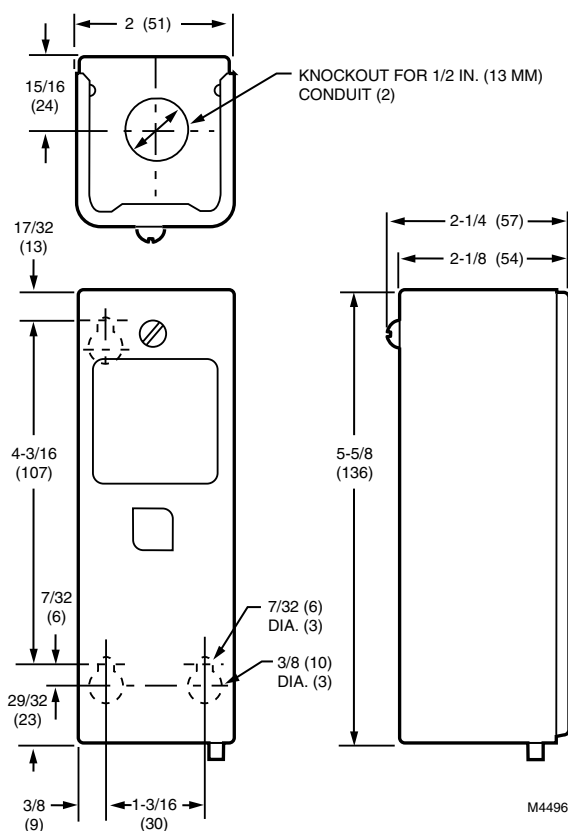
Dimensions of T4031, T6031 in in. (mm).
